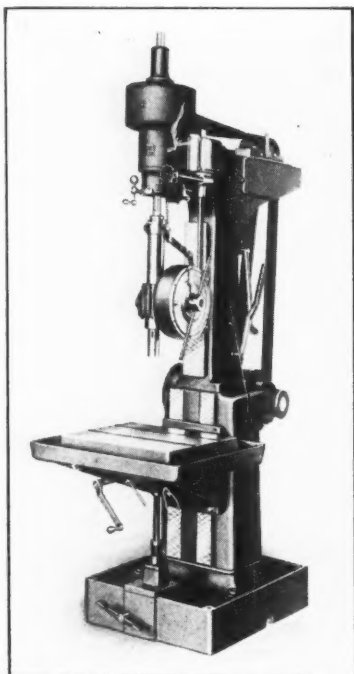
Single-spindle Belt-driven Machine with Power Feed
